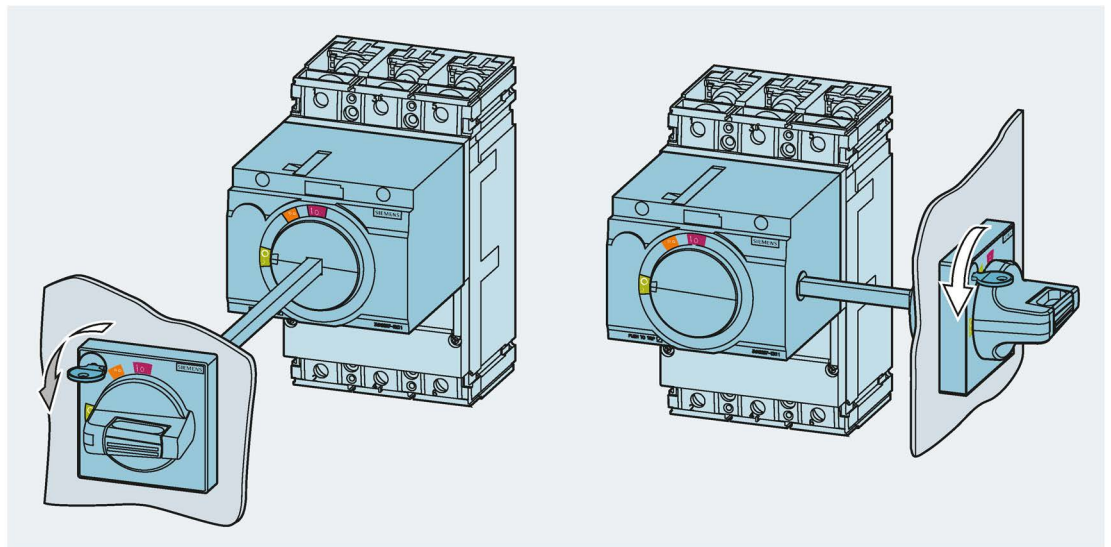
Lockable door-coupling rotary operating mechanism of a 3VA... molded case circuit breaker
